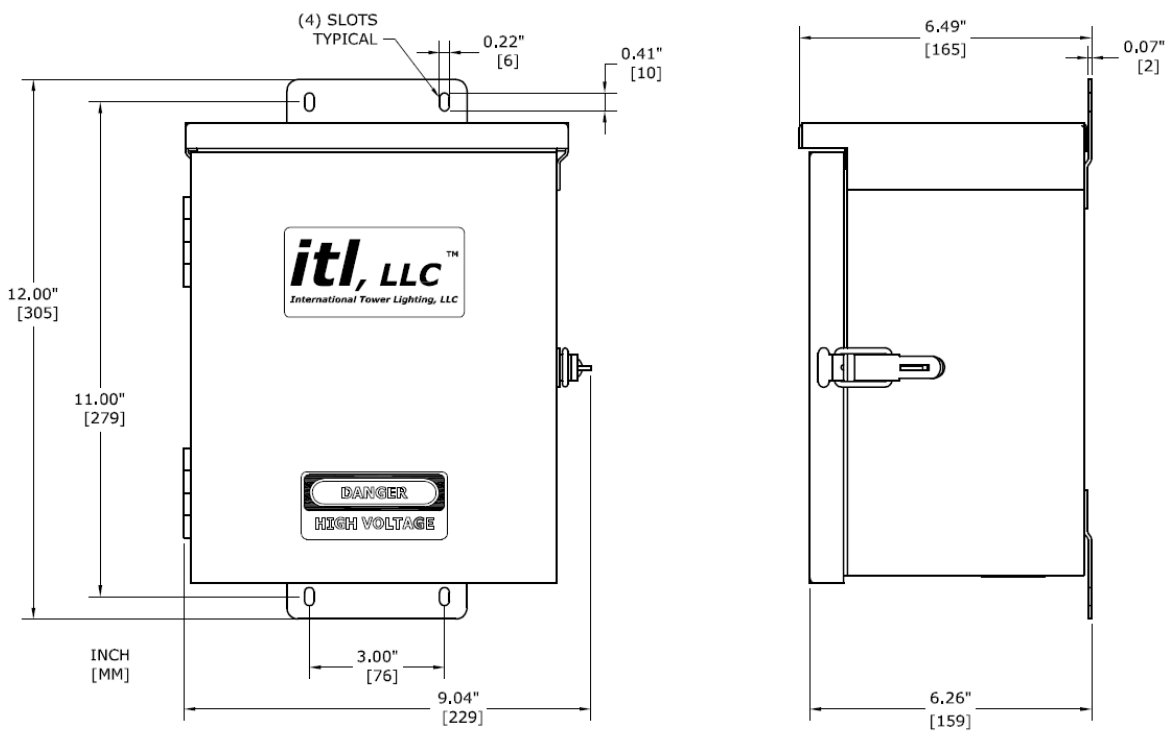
Mounting Details and Dimensions of Enclosure Panel
